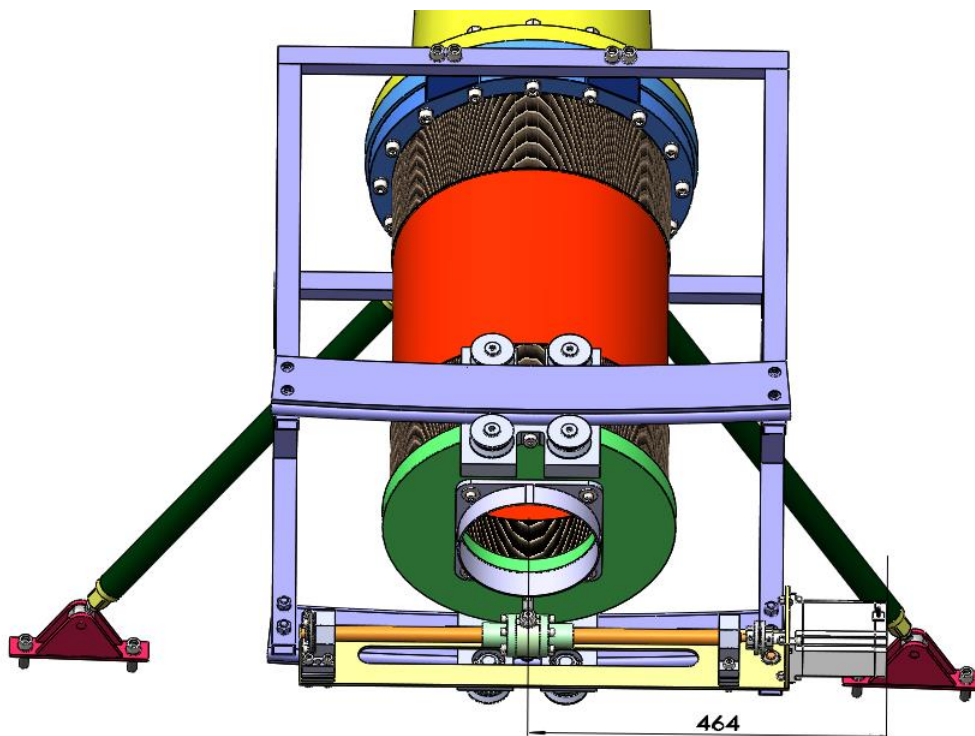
Front view of bellows weldment and kinematic mechanism with highlighted dimension of maximal width occupation
